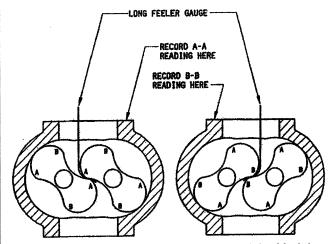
A Checking Interlobe Clearance on 2-lobe Models
